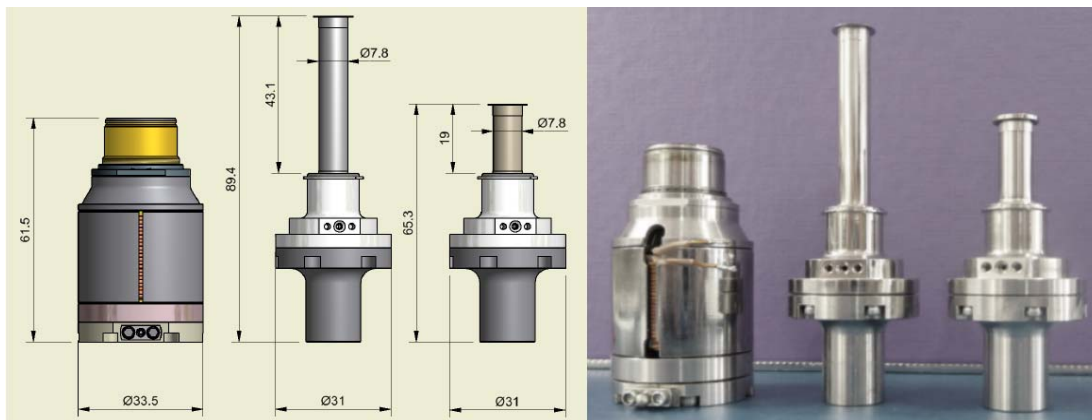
External layout and pictures of the linear K527 compressor, regular and shortened cold fingers
